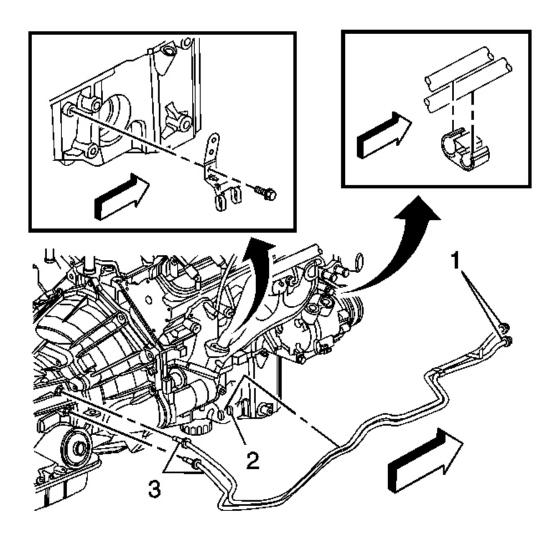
View Of Transmission Oil Cooler Lines Courtesy of GENERAL MOTORS CORP.
